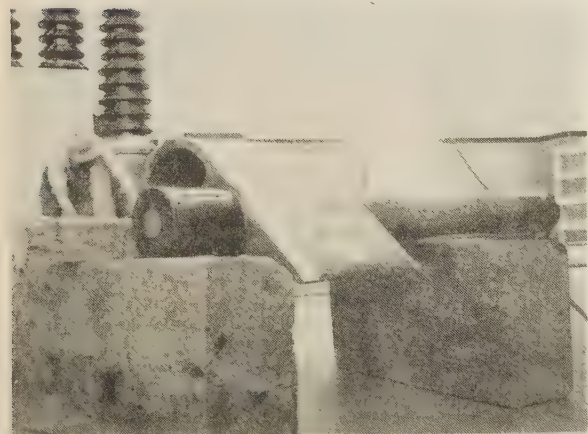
GUIDE VANE REPAIRED BY ARC-WELDING STEEL TO WORN EDGES
